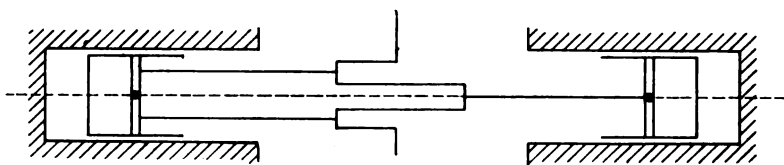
Two-cylinder opposed engine cylinder-in-line.
